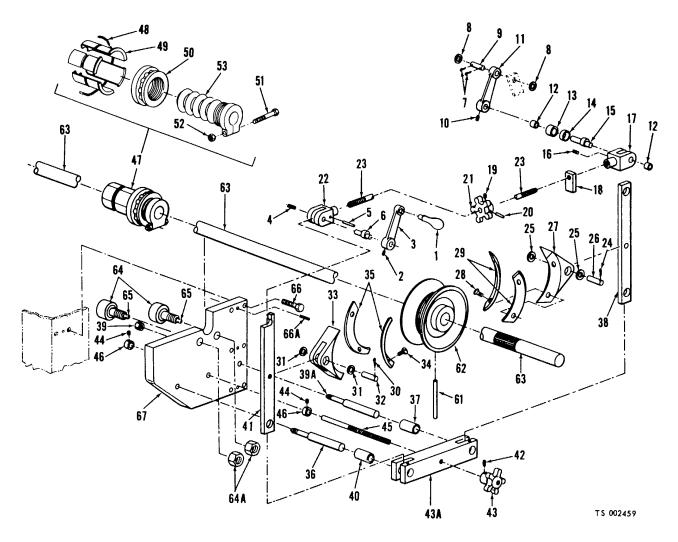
Feeder assembly (Sheet 1 of 5)
